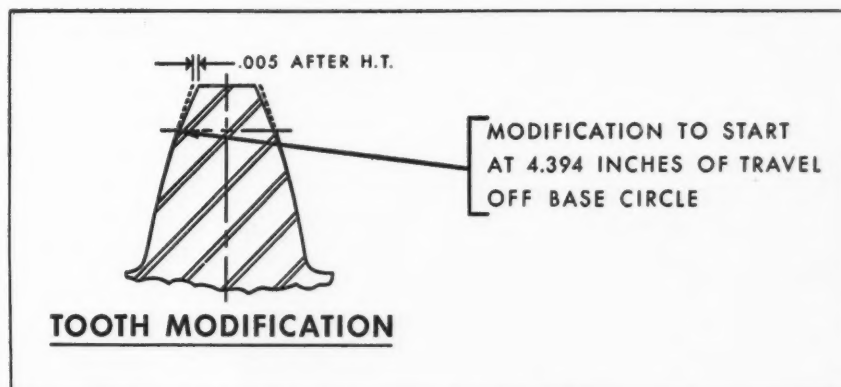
Involute modification at the tip of a drive-gear tooth is produced in hobbing and corrected after heat-treatment by crown-shaving
